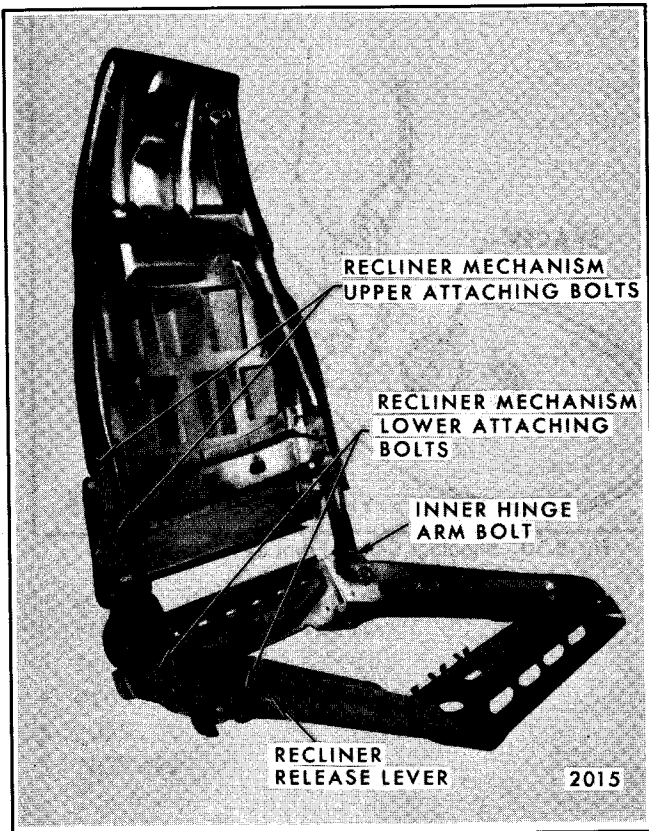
Seat Assembly Tubular Frame Construction
